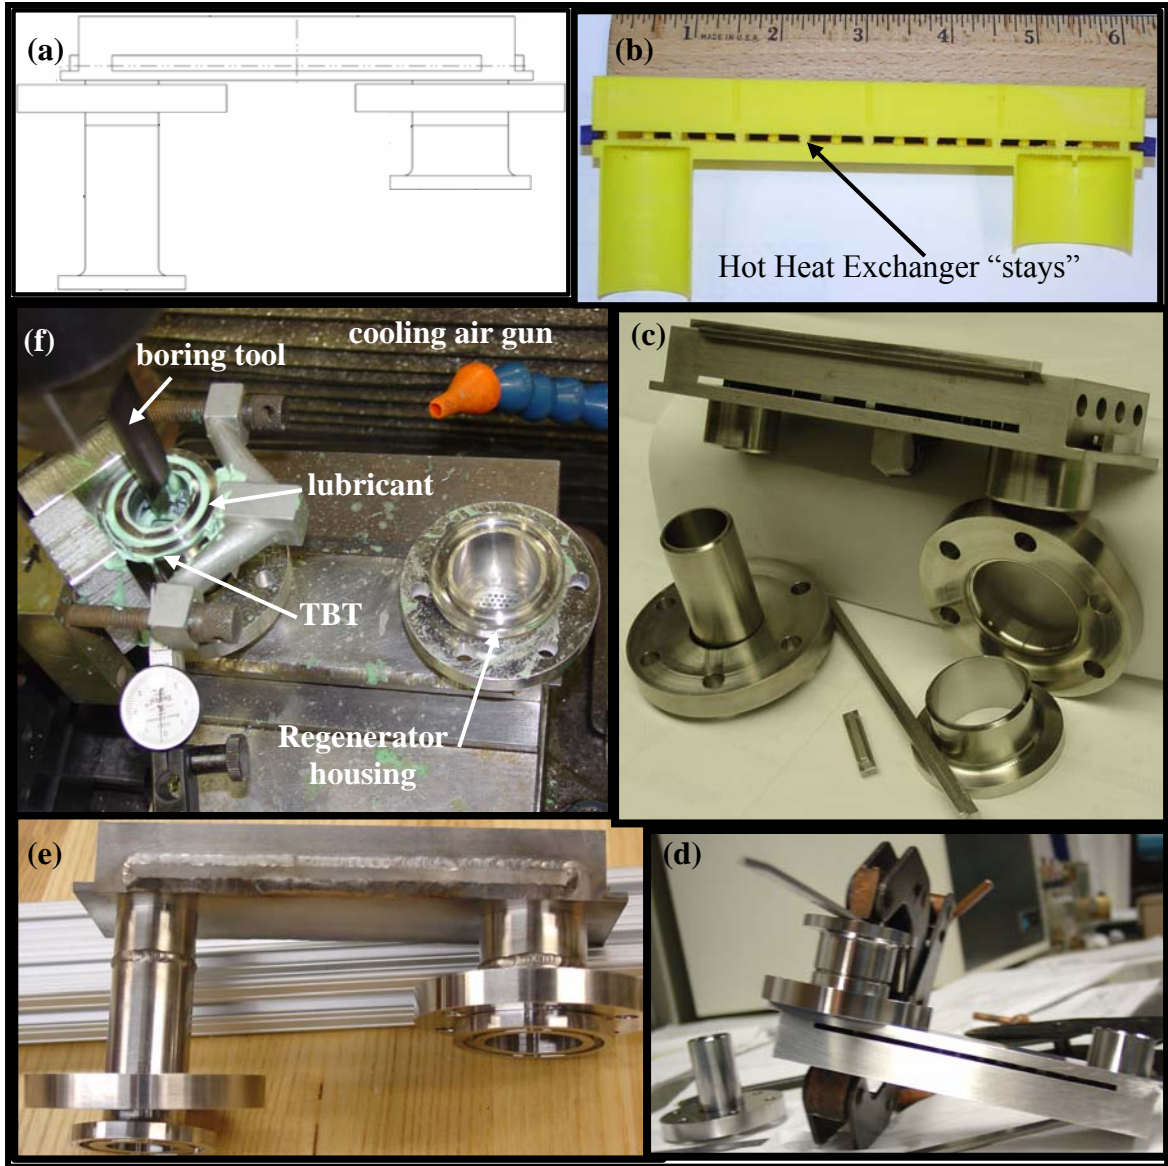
Thermodynamic Section. (a) Assembly drawing. (b) Full-scale cross-section plastic rapid-prototype model used to assist discussions with the machinist. The “integral stays,” thin tube walls, Regenerator side central “post” and the blue plugs to be fillet welded are shown. (c) Individual components prior to weld. (d) Ready for first spot weld tack on Regenerator housing. (e) Ready for final assembly. (f) Post-weld inside diameter bore in a milling machine.
